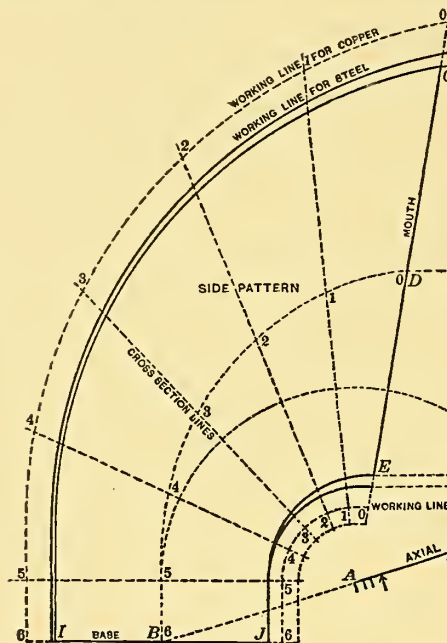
SIDE VIEW OF COWL, SHOWING METHOD OF OBTAINING THE SIDE PATTERNS.
